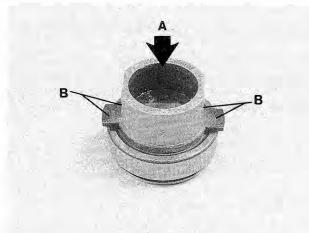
Release bearing lubricating groove (A) and guides (B) to be greased.
